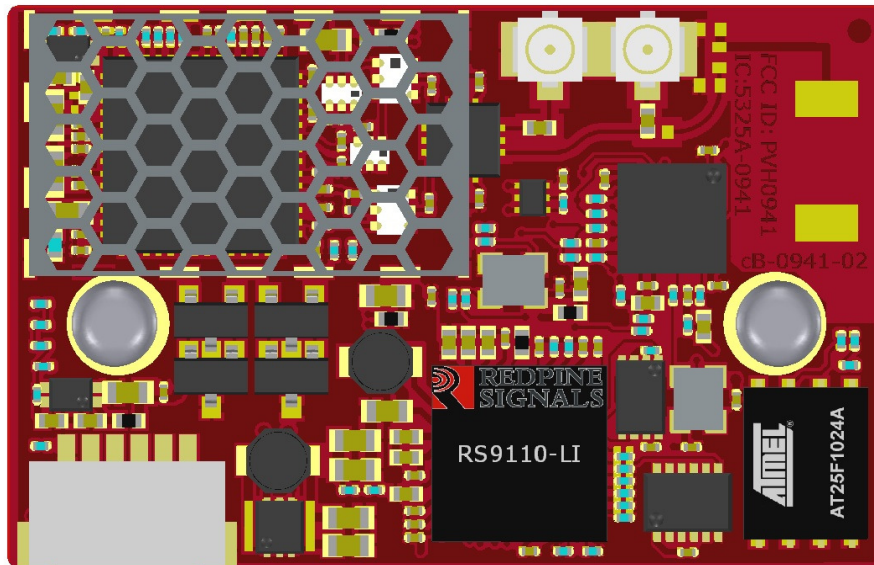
OWS451x FCC/IC identifier printed in the primary side solder mask
